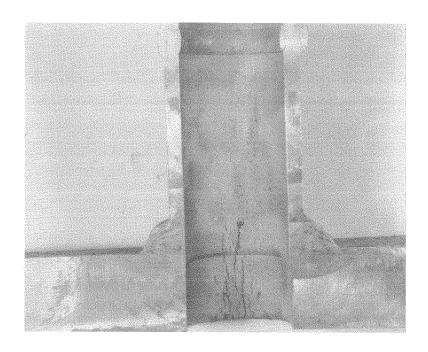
View showing internal cracking along the tube connector and bore of an Economizer Header.
